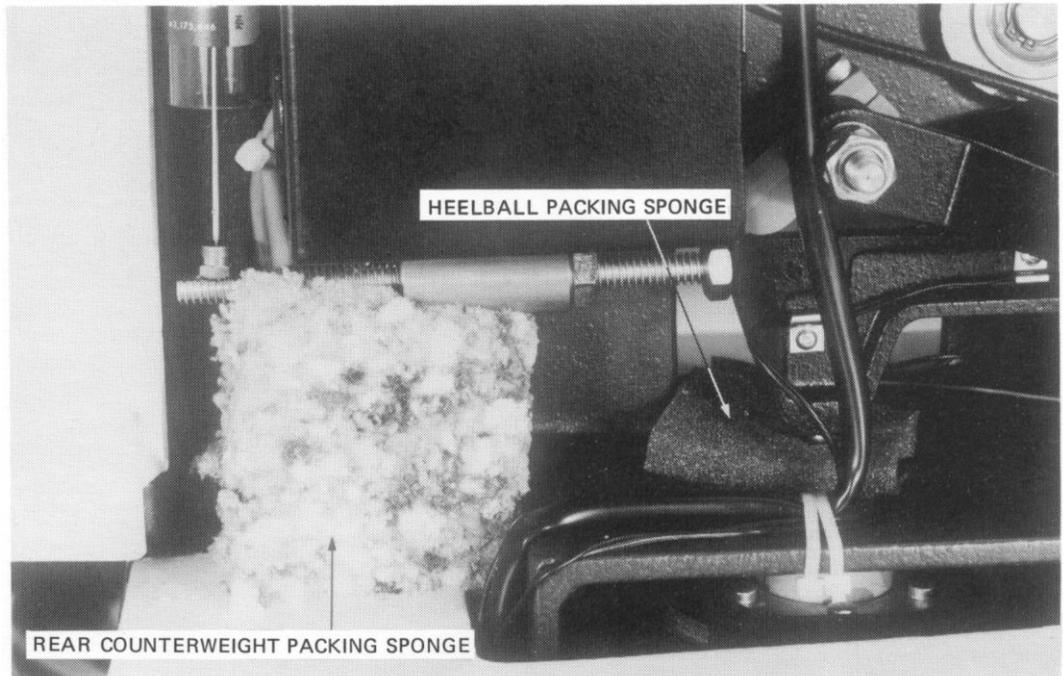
MAIN HEAD PACKAGING - INNER LEFT SIDE
